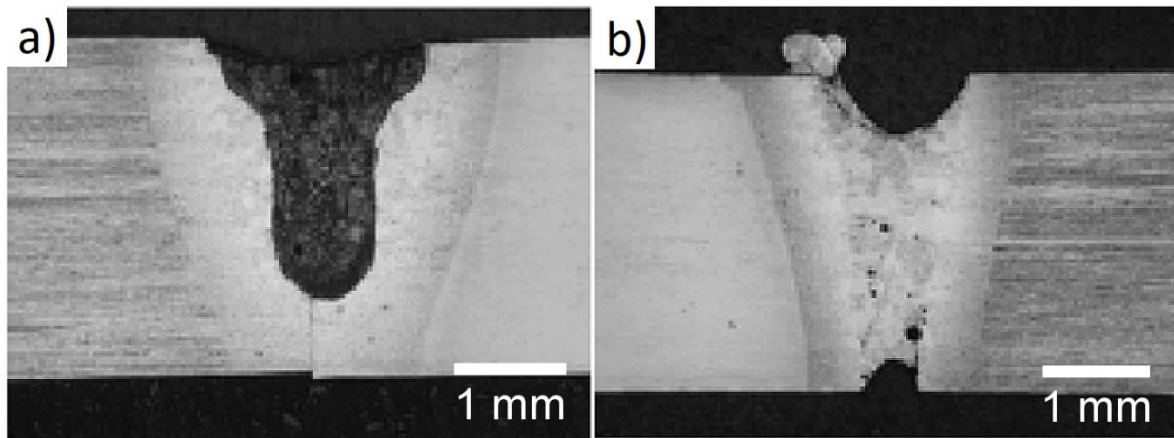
Morphology defects in the welding zone: a) lack of penetration caused by low heat input or fast beam speed b) face and root concavity caused by high heat input resulting in metals vaporising[43].
